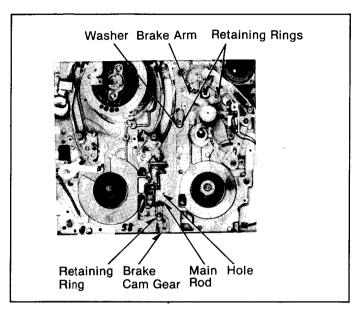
Assembly and Adjustment of Gears and Rod-(8)
